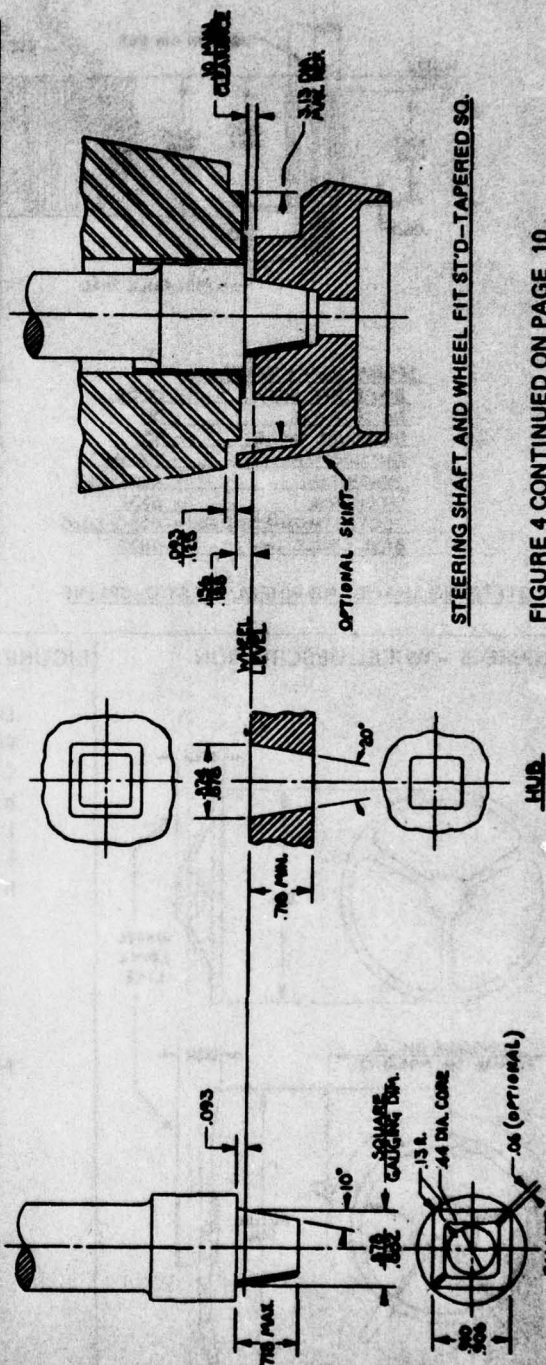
STEERING SHAFTS & STEERING WHEEL HUBS
